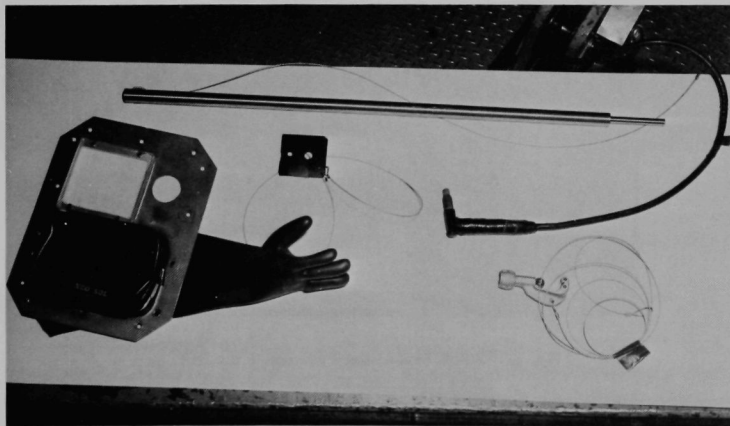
Tools Used for Cutting Free the Upper End of the Evacuation Tube. ANL Neg. No. 103-05258.
